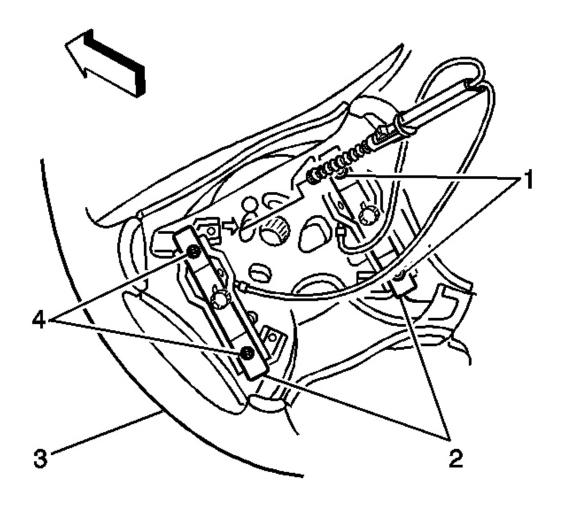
View of Horn Contact Plate, Steering Wheel & Screws Courtesy of GENERAL MOTORS CORP.
